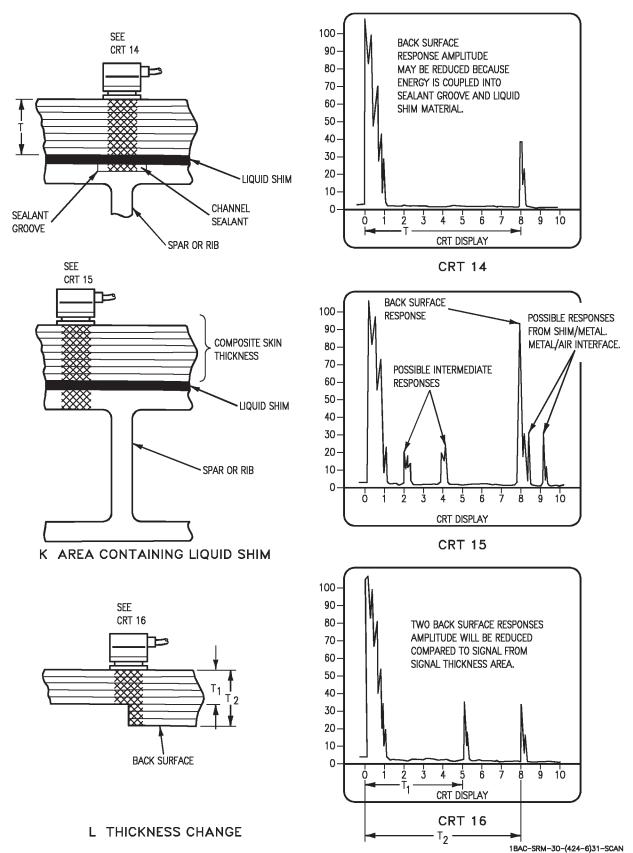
Typical Composite Laminate Inspection (Sheet 6)
